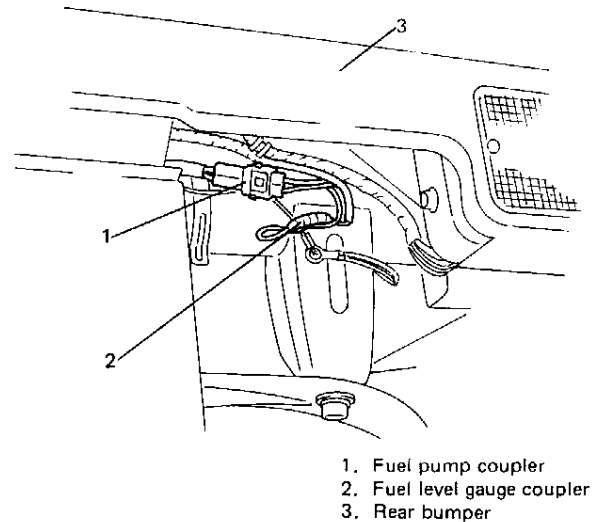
Fuel Pump and Level Gauge Couplers
